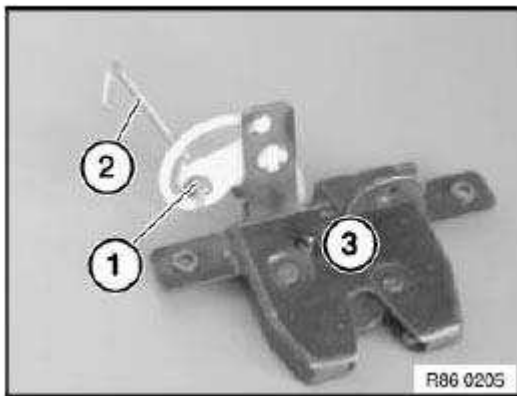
Identifying Spring Nut, Rod & Rotary Striker Lock
